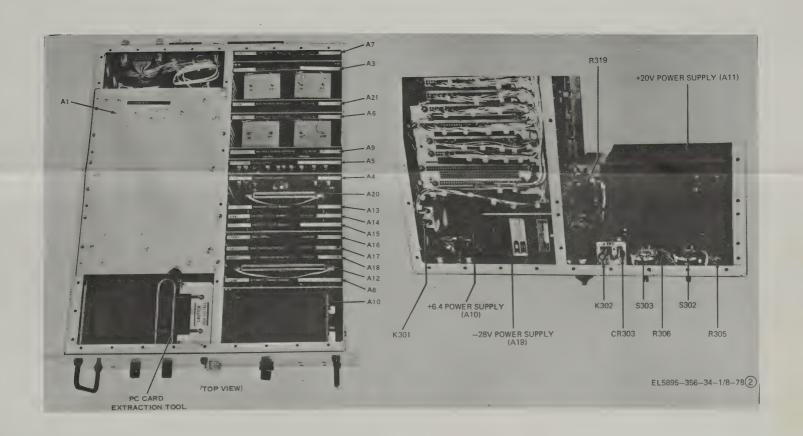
\odot . Transmitter chassis assembly (6A9/6A11) parts location diagram (sheet 2 of 3).
